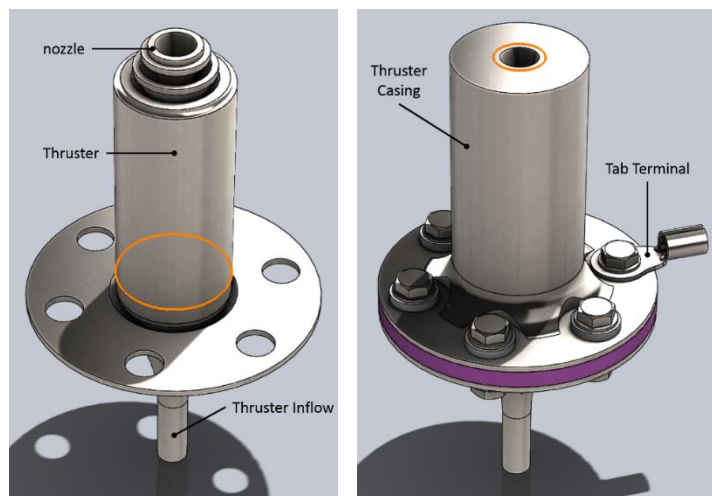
CAD model showing the position of the two EB welds performed on the AMR-X-0 assembly.
